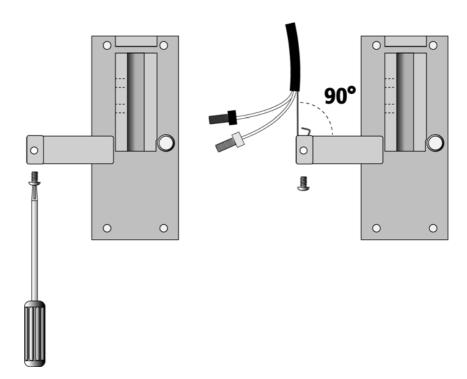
Attaching the transfer tubing kit to the Sideport Syringe Adapter
